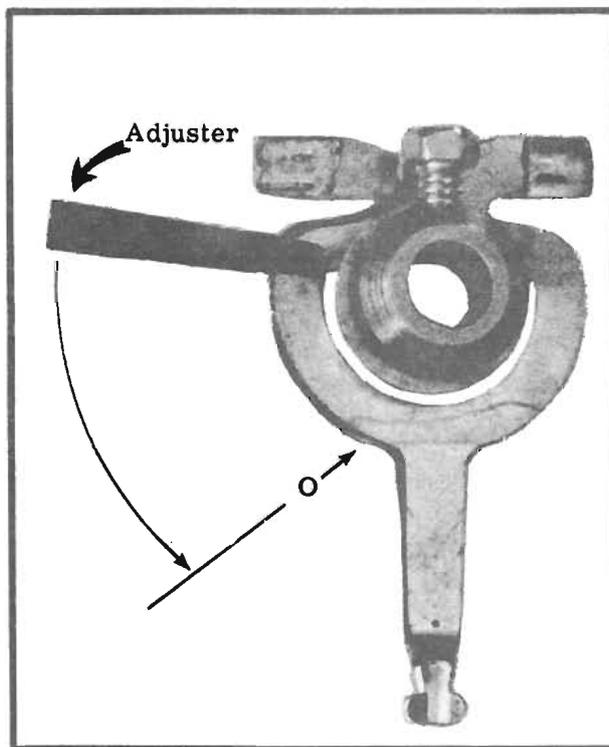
An Adjuster is being Used to Add Tension (Follow) to Line and Control Wiper Springs.
